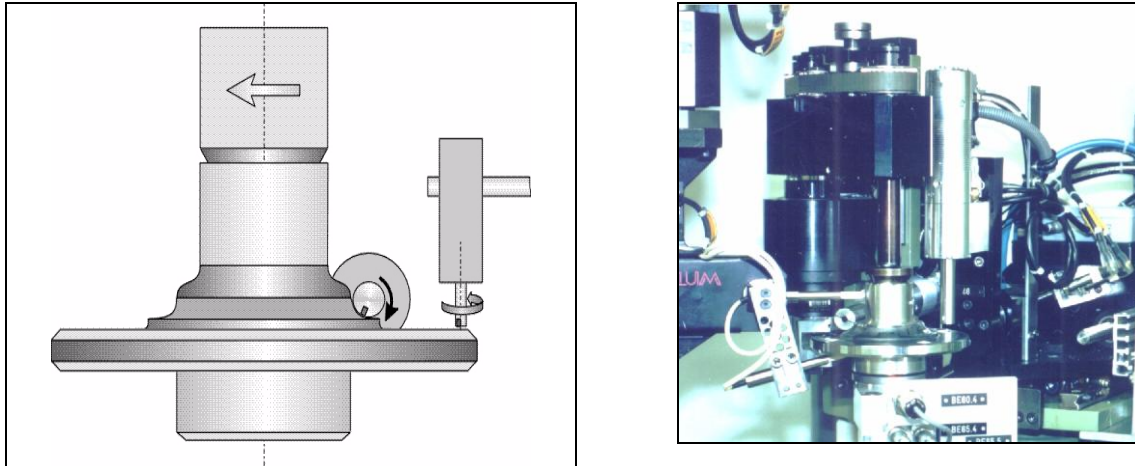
Example of a combined application of the Rotating Probe in wheel hub testing. Testing the flat surface for longitudinal and transversal defects by Rotating Probe T. Testing the radius for transversal defects by Rotating Probe R.
